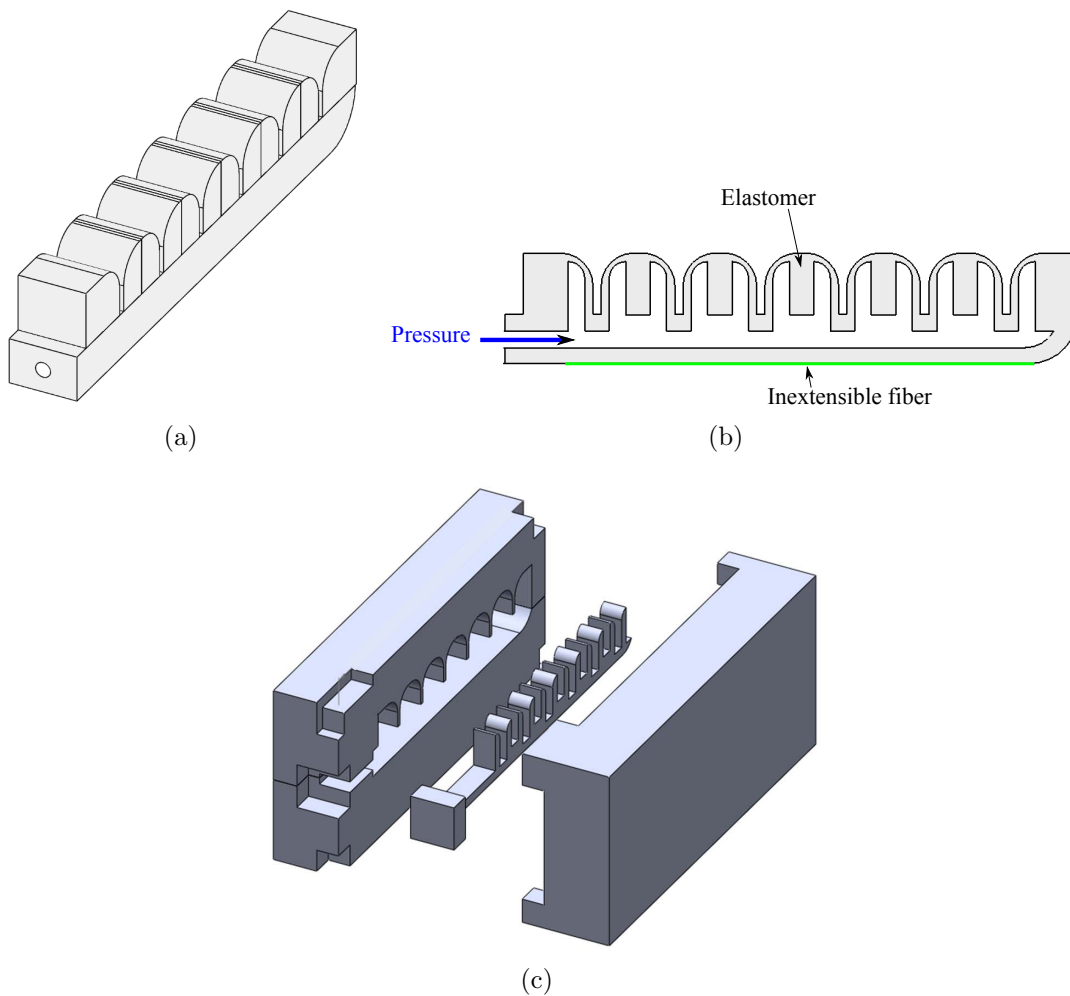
(a) The trimetric view and (b) side view of a bending actuator design using an elastomeric material, and (c) the CAD rendering of the mold.
